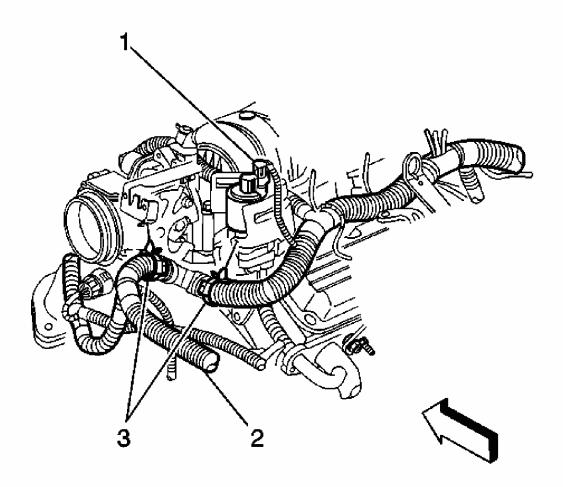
View of EGR Valve, Engine Harness Clips & Wiring Harness Courtesy of GENERAL MOTORS CORP.
